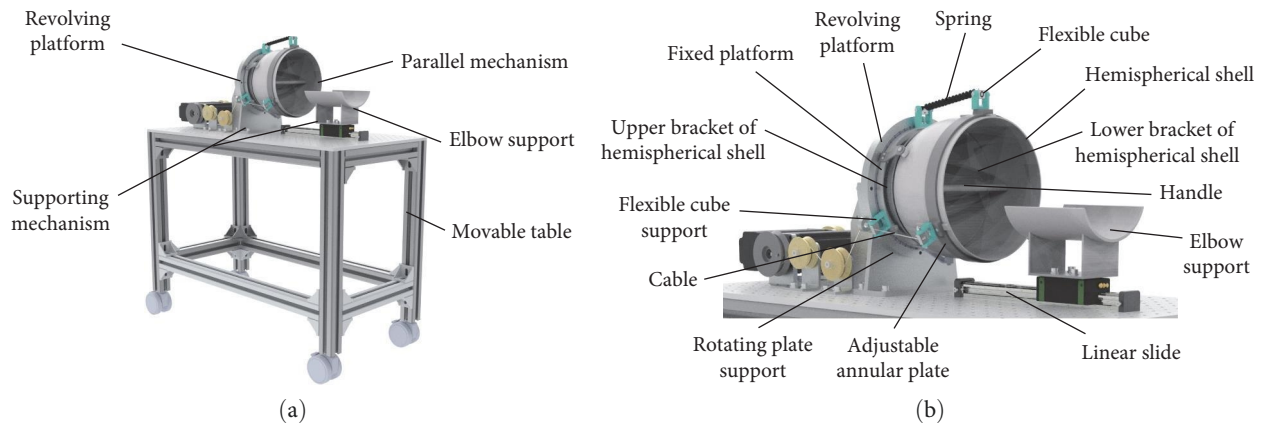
Three-dimensional model of cable-driven mechanism. (a) Oblique side view. (b) Detail view.
